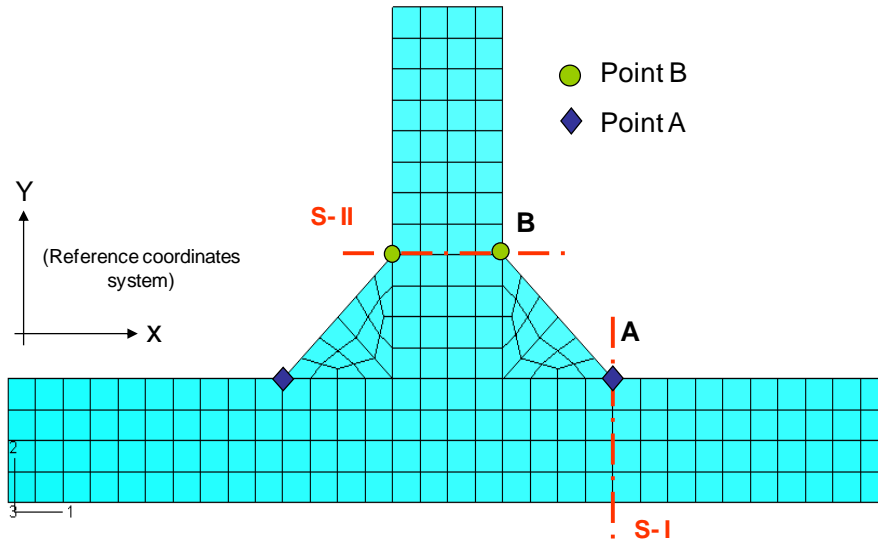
Fatigue crack initiation sites at critical weld toe cross sections
